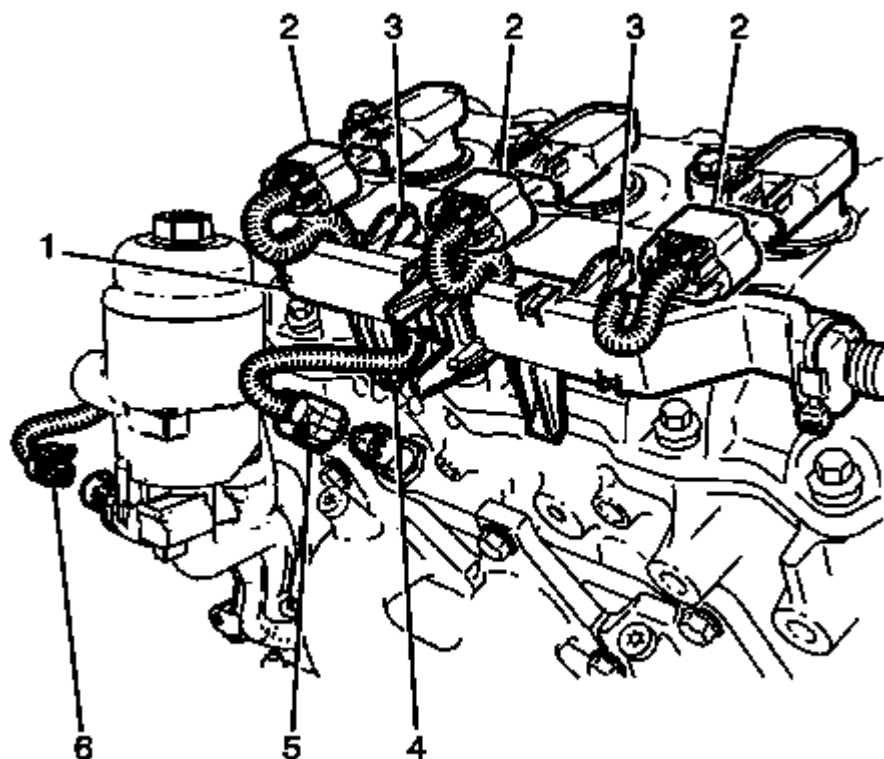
Ignition Coil Electrical Connectors & Wiring Harness
